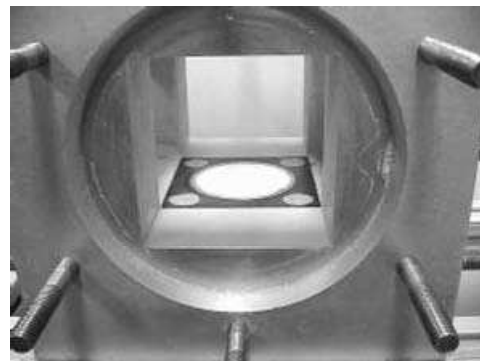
Cubical base aluminum piece fitted onto bottom assembly.
